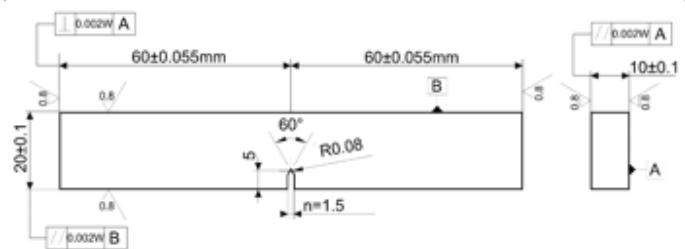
Schematic drawing of the SEN (B) specimen with dimensions.
